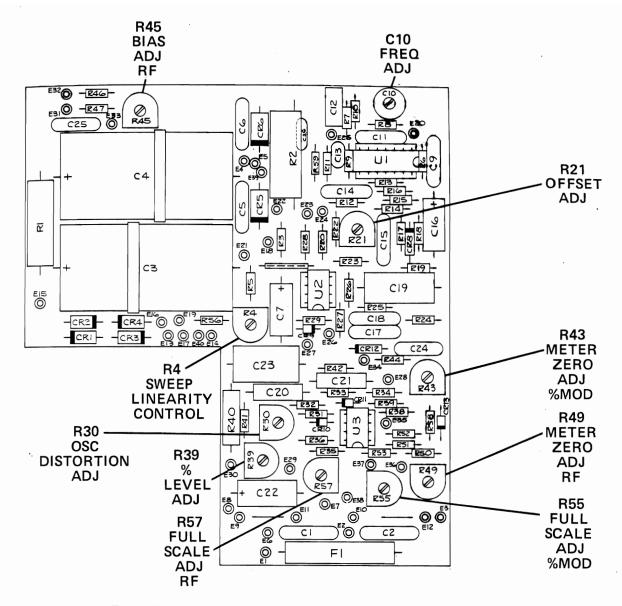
Printed Circuit Board A1A2, Components and Adjustments
